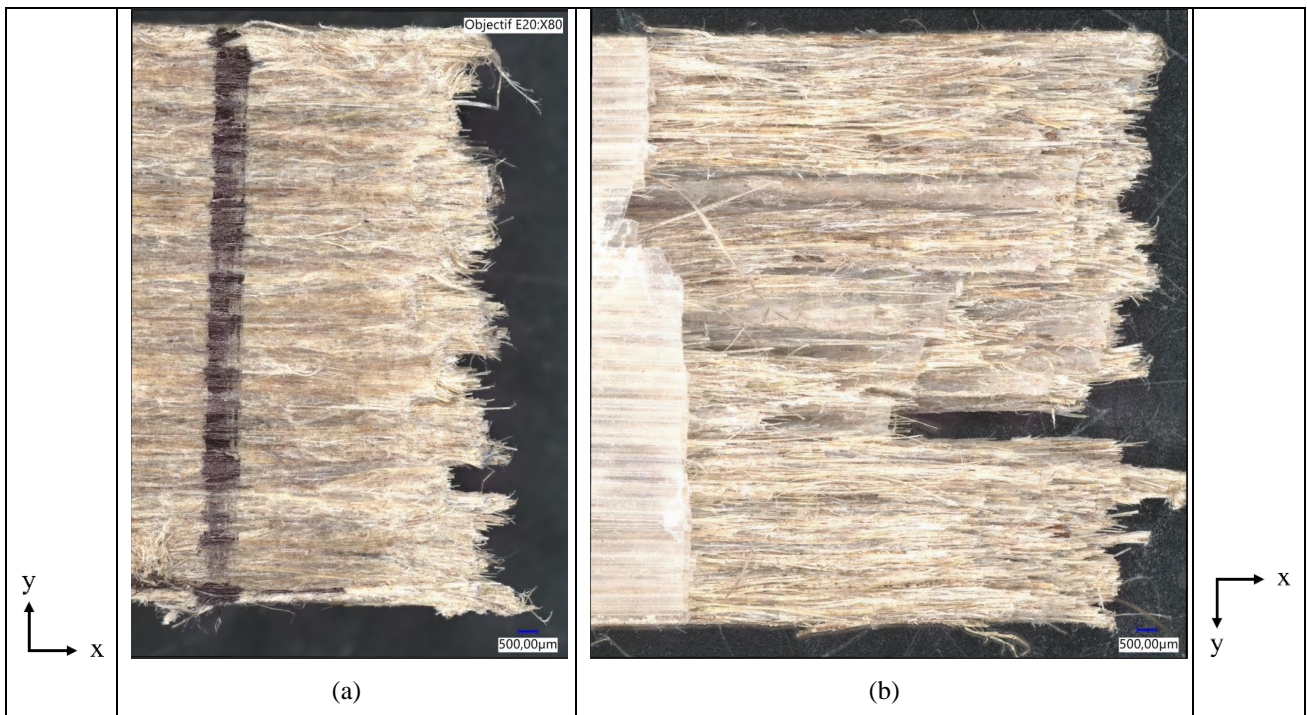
Digital 3D micrographies of HybHP specimens after fracture as seen from (a) top view and (b) bottom view.
